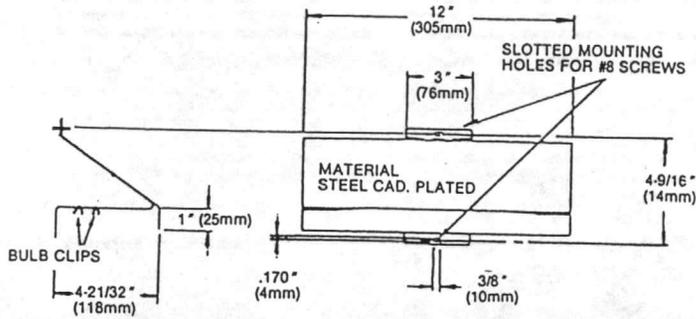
MODEL 100-13 SUNSHIELD FOR MOUNTING TEMPERATURE SENSING BULBS ON OUTSIDE WALLS
